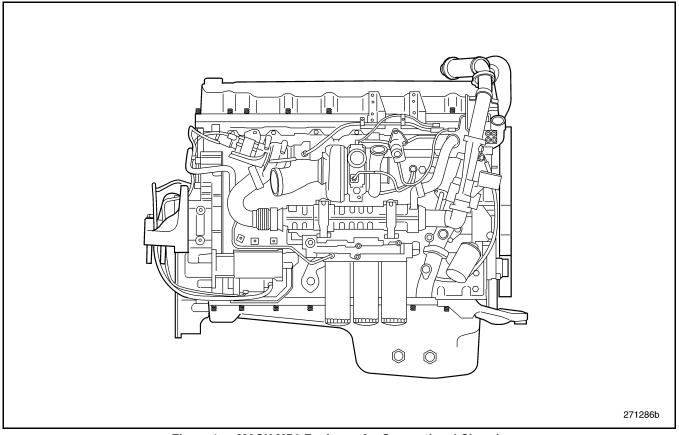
MACK MP8 Engine — for Conventional Chassis
